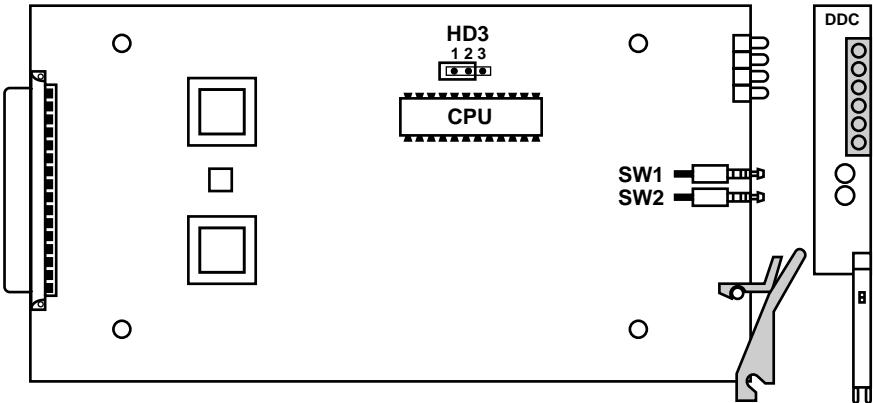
High-Speed Dual Data Card Front Plug Assembly, the DDC.
